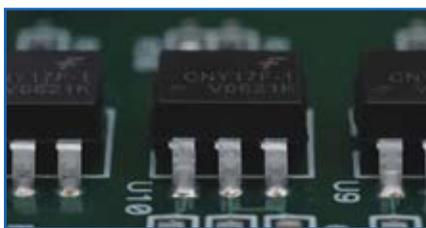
Complete hole-fill of 0.093 inch thick board with 3/4 inch thickness solder impingement.
